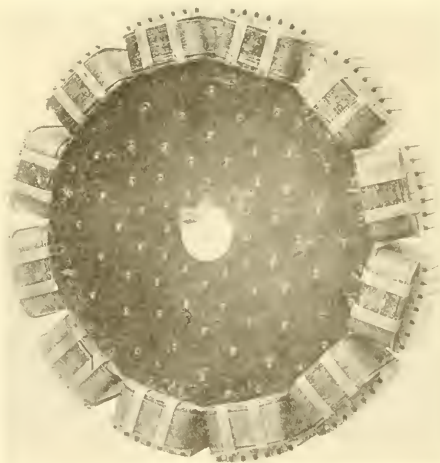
SPIDER BUILT UP OF 1/16 INCH SHEET STEEL LAMINATIONS cutters to secure the greatest degree of accuracy possible on the angles, fillets, etc. It would be cheaper to slot out these dovetails, but with this process there would be a possibility of imperfect fitting, sharp fillets and injurious tool marks.
